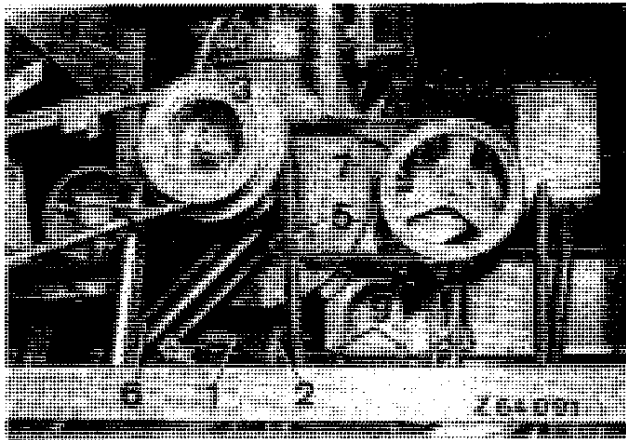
Removing Various Engine Connections Near Drive Pulley
